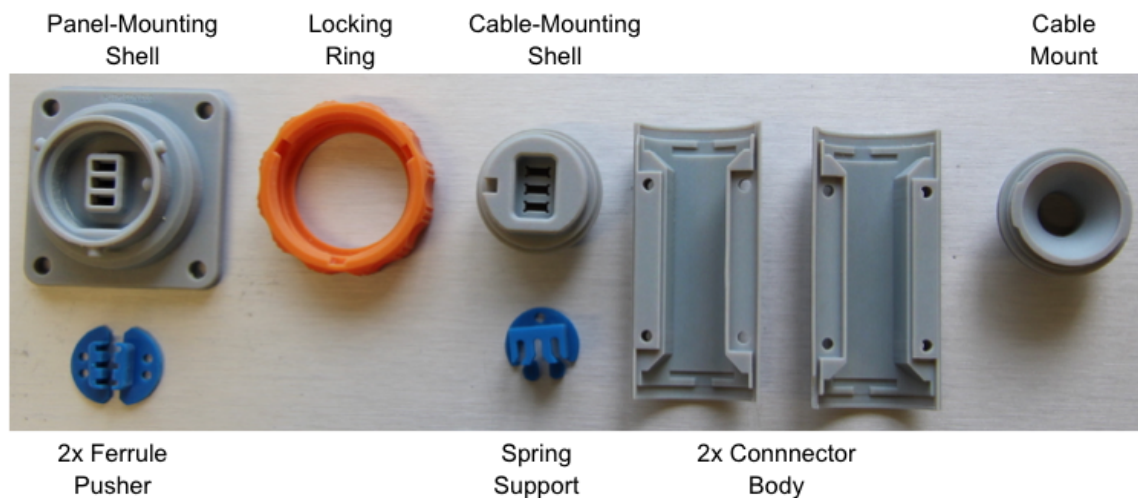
Photograph of umbilical connector parts which were 3D printed for evaluation.
